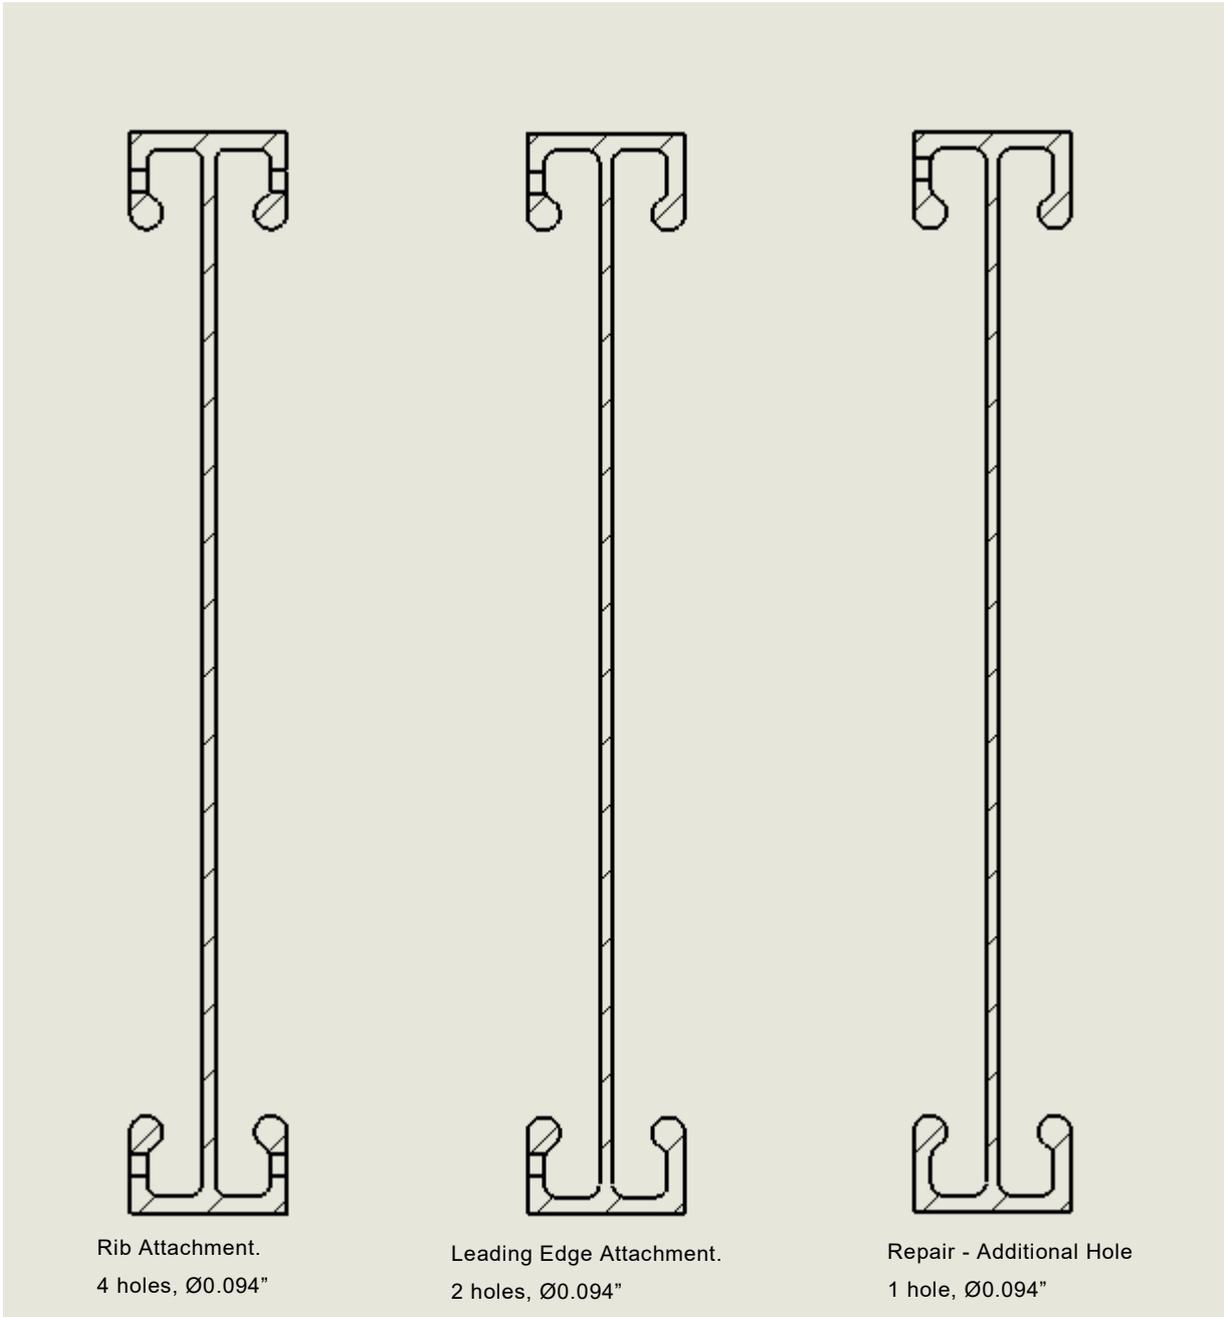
Design and Repair Configurations – Typical Spar Cross Section at Rib Attachment
